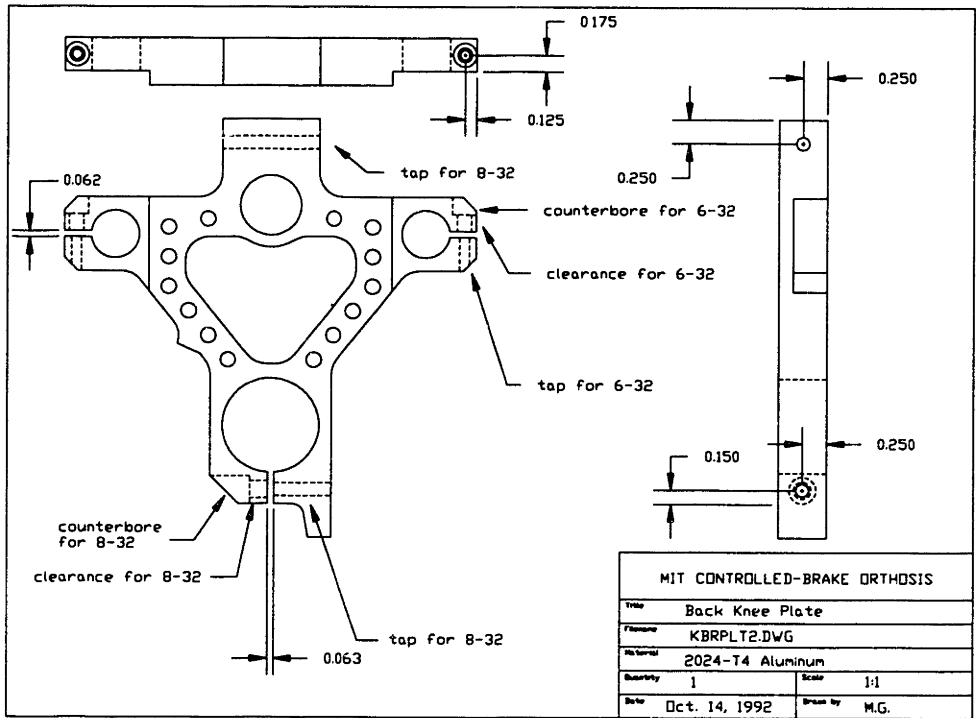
Back plate for right knee gear housing (drawing 2 of 2).
